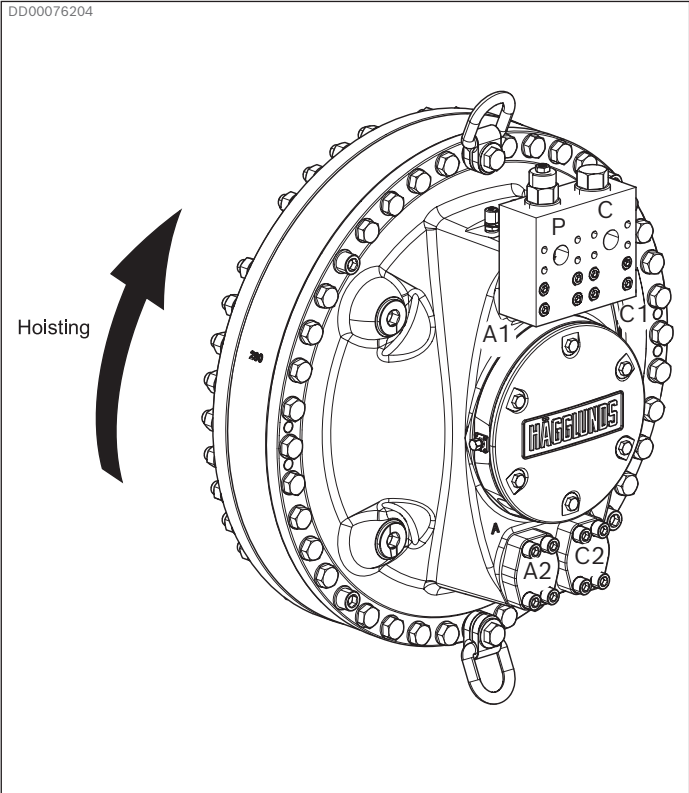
Example Quantum configuration C: High pressure in P valve / A1 motor (Hoisting), motor shaft rotating counter clockwise viewed from the motor shaft side. Lowering in C valve / C1 motor port
